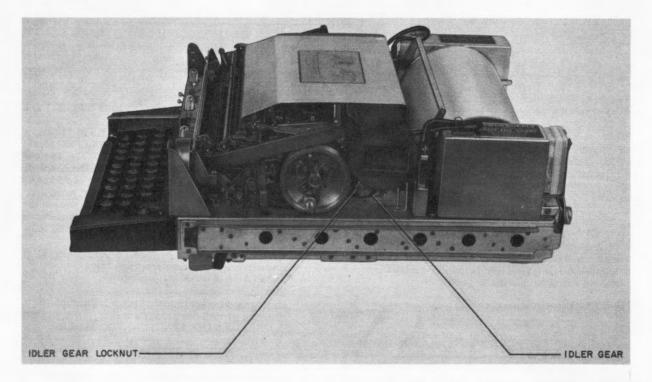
Printer and Electrical Chassis, Right-Side View
